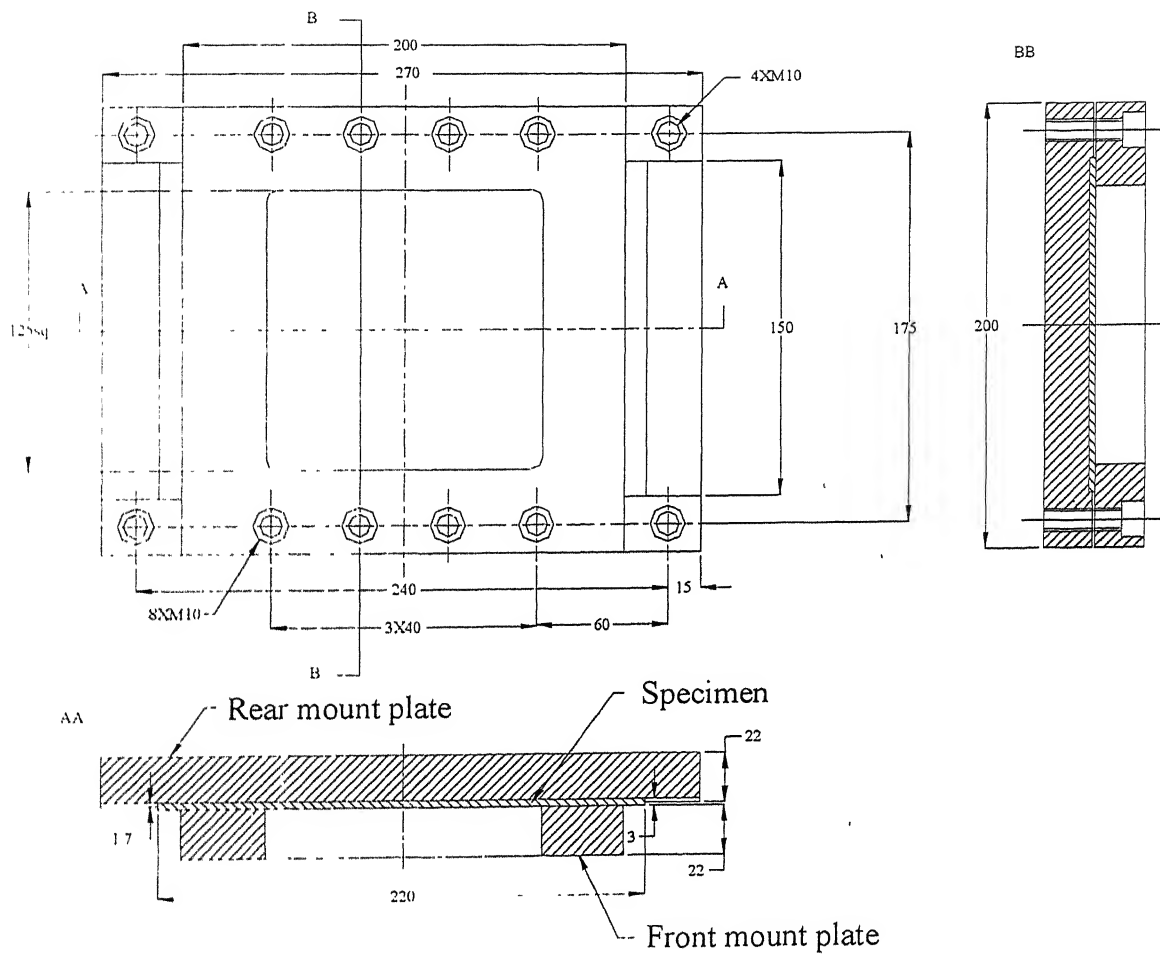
Assembly of mounting arrangement of specimen
